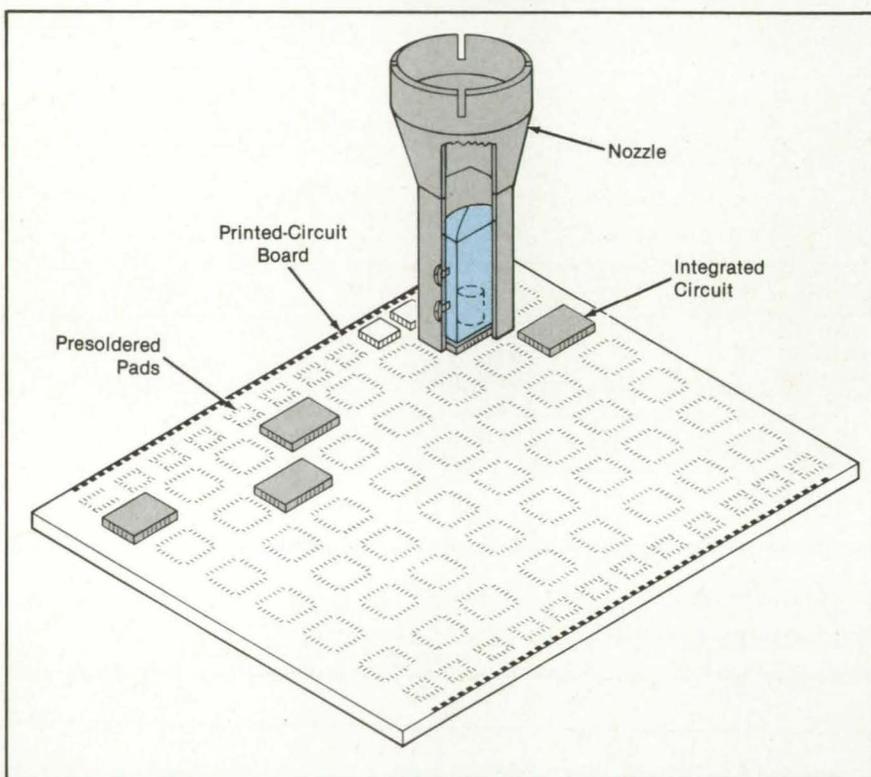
A Hot-Gas Soldering/Desoldering Nozzle removes a leadless, surface-mounted, integrated circuit from a printed-circuit board. The nozzle can be used with a hot-air gun of the type used to apply heat-shrink tubing or with some other source of hot gas.
